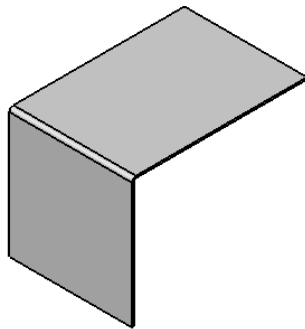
Flange created with the Trim Support check box cleared
